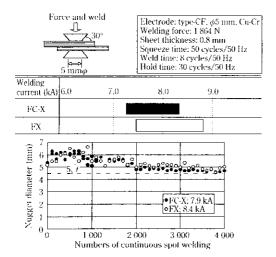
Spot weldability of FC-X and chromate coated sheet
